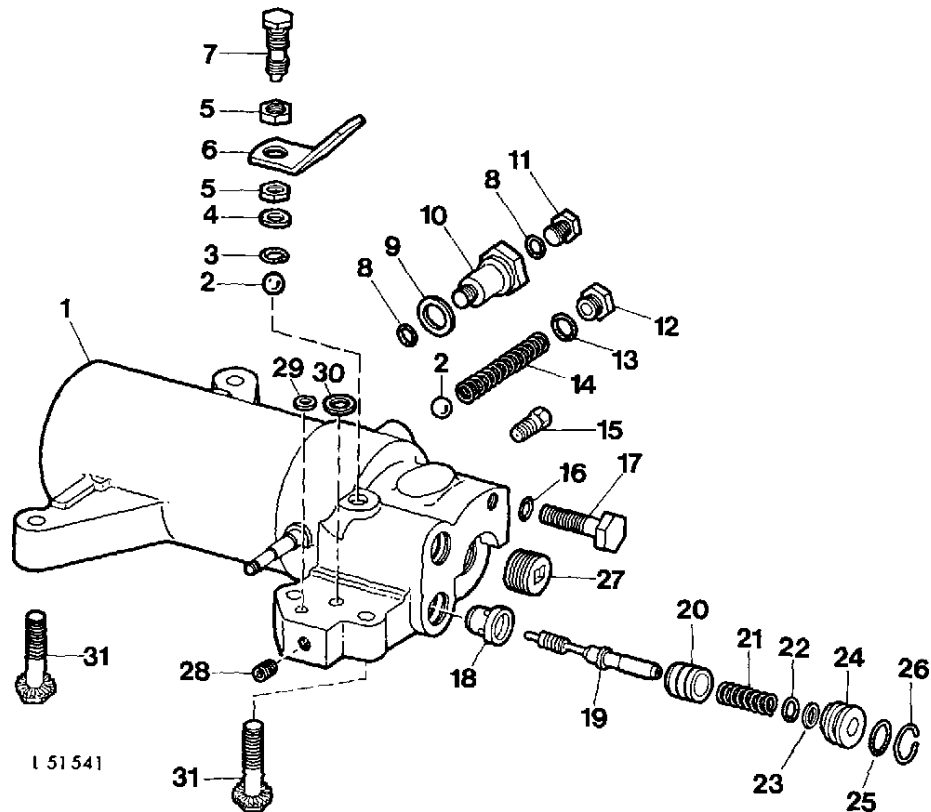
Exploded View of Rockshaft Cylinder and Valve Housing
